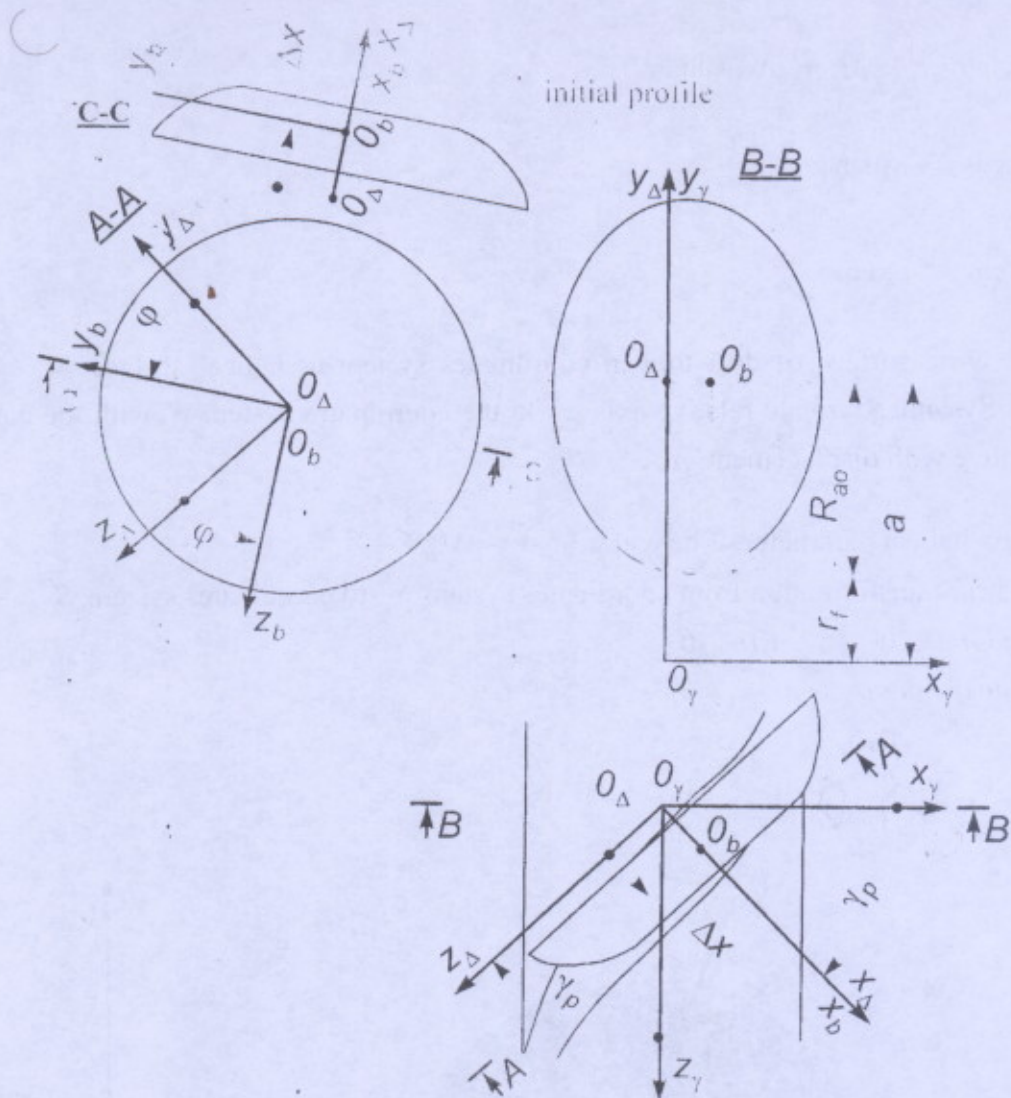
Disk tool in coordinate system S_b with adjustment of cutting machine for helical surface.
